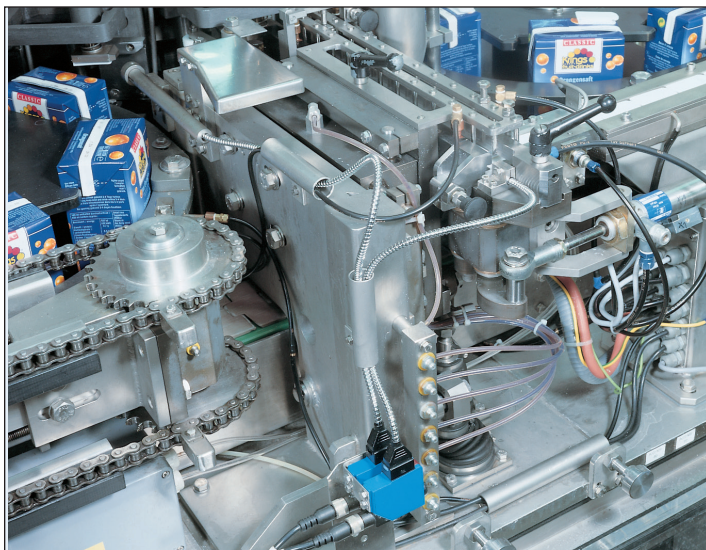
Object detection using fiber optic cables; checks presence of spout on containers
